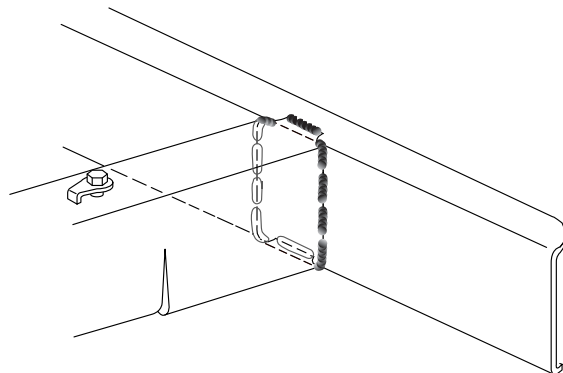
Mig Stitch Welded to Frame Rails
